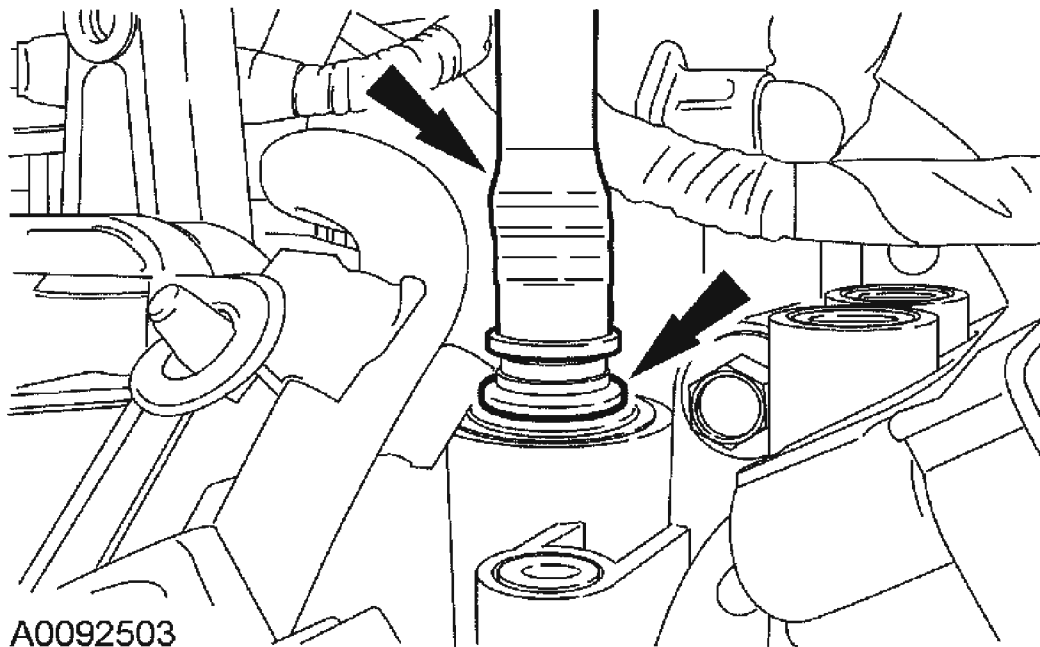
Installing Power Brake Booster Vacuum Tube Into Quick Release Fitting
